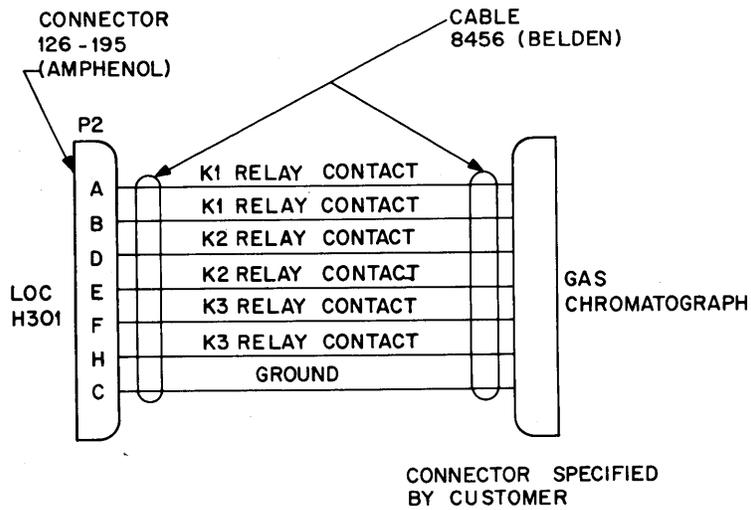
LOC/Gas Chromatograph Cable Assembly, Fabrication Drawing
